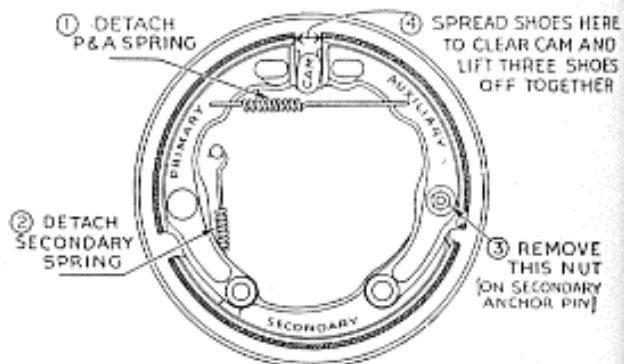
Shoe assemblies are removed from axle by following above operations in numerical order
